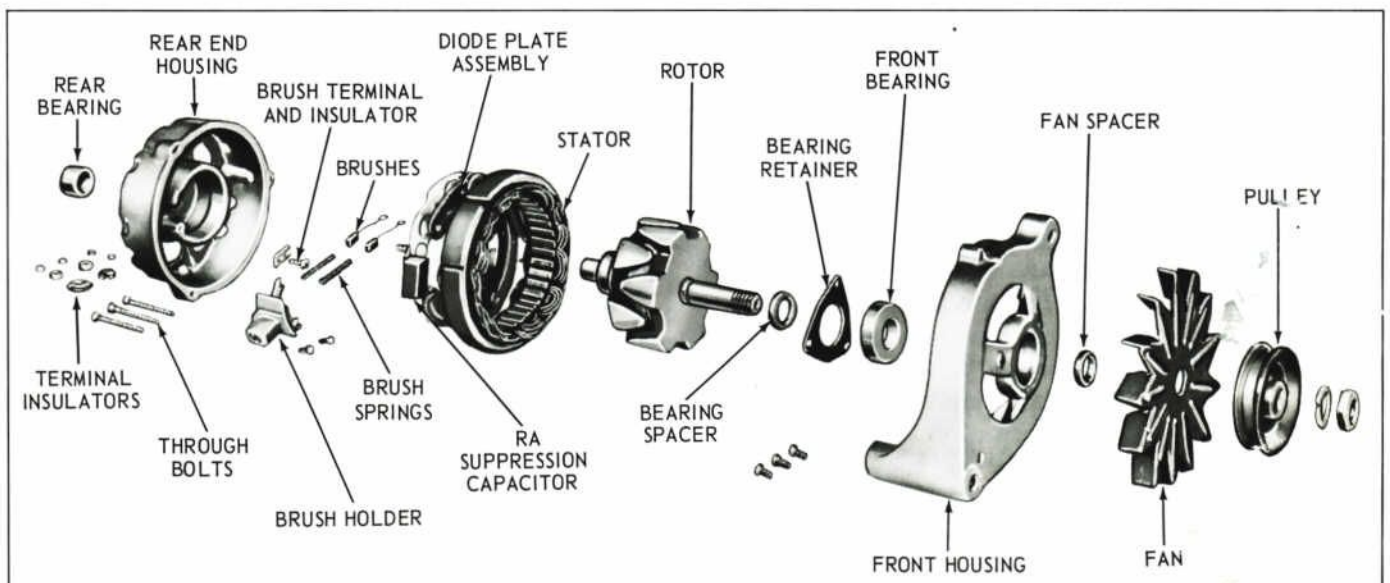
1964-66 ALTERNATOR (EXPLODED VIEW)
